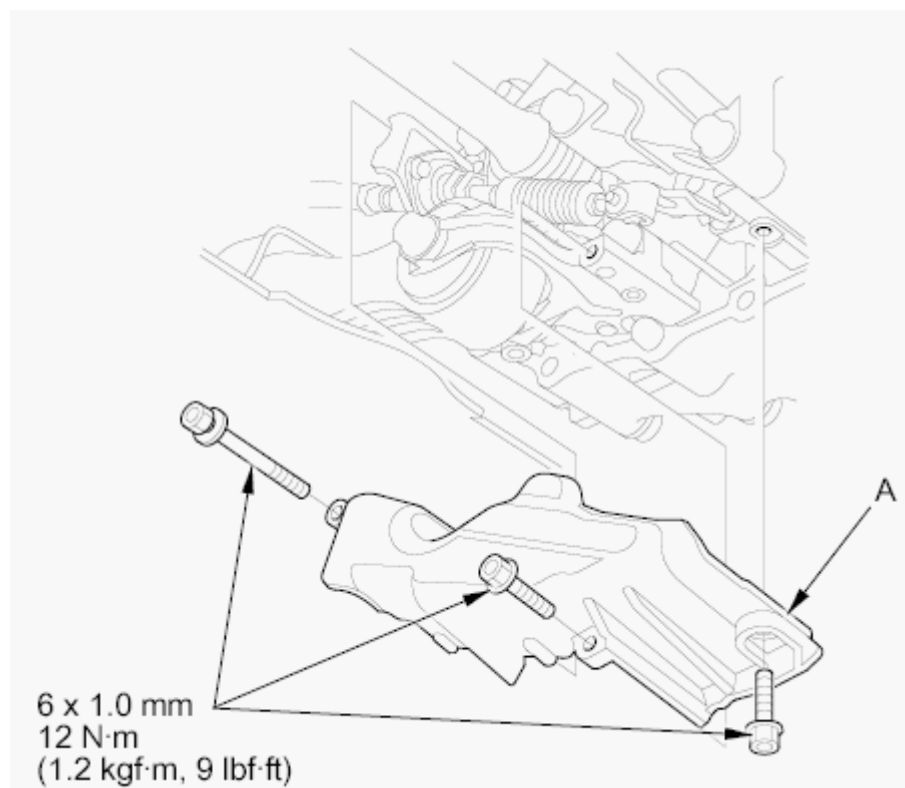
Identifying Lower Torque Rod Bracket With Torque Specification
